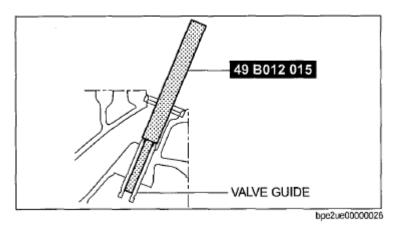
Tapping Valve Guide Out From Combustion Chamber Side
